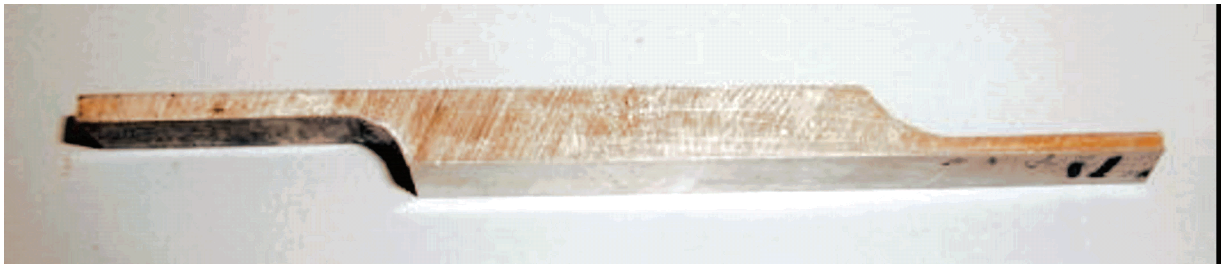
Ring Master® uses two 1/16" x 3/18" blades as cutting tools.
